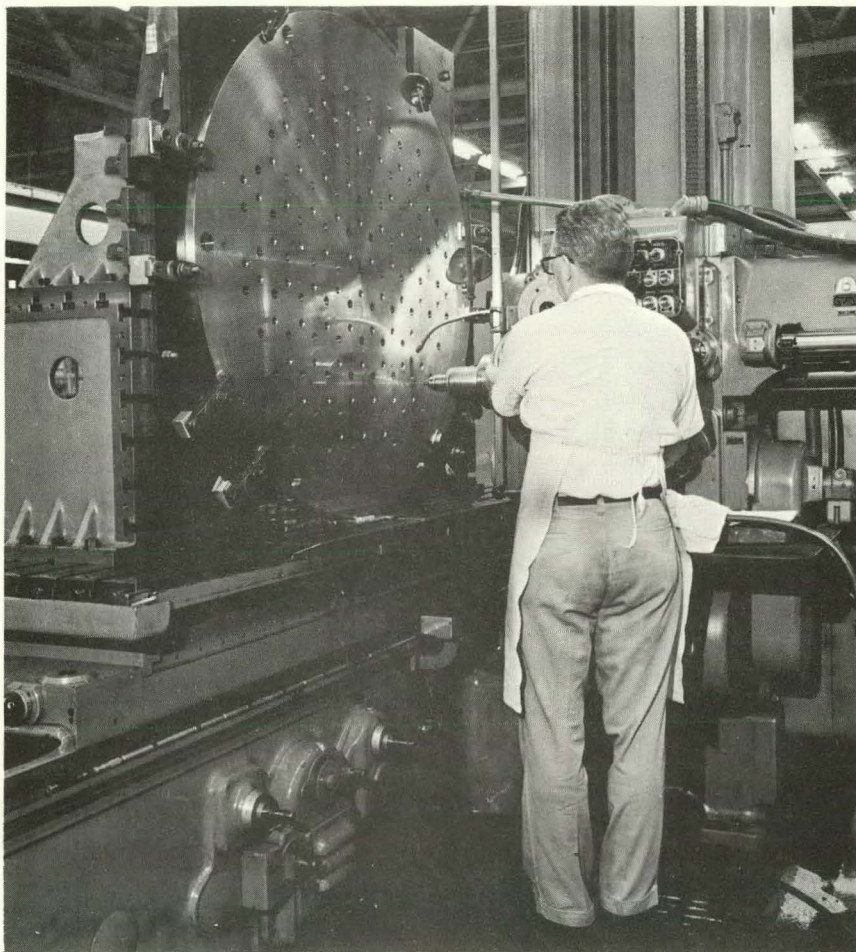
Machining bottom tube sheet (Neg. P62-5-20 A)
